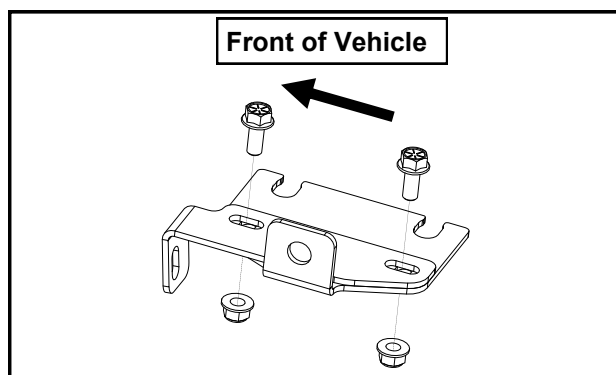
(Rear Mount to Rear Mount Bracket Fasteners)
